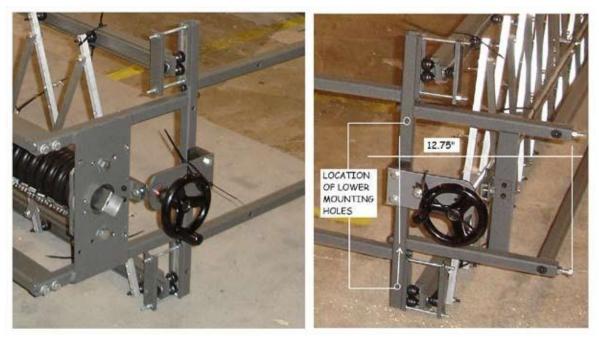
Orientation of Side Frame Bars at Upper and Lower Assemblies
